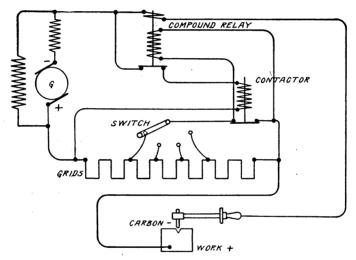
Wiring Diagram for General Electric Welding System
